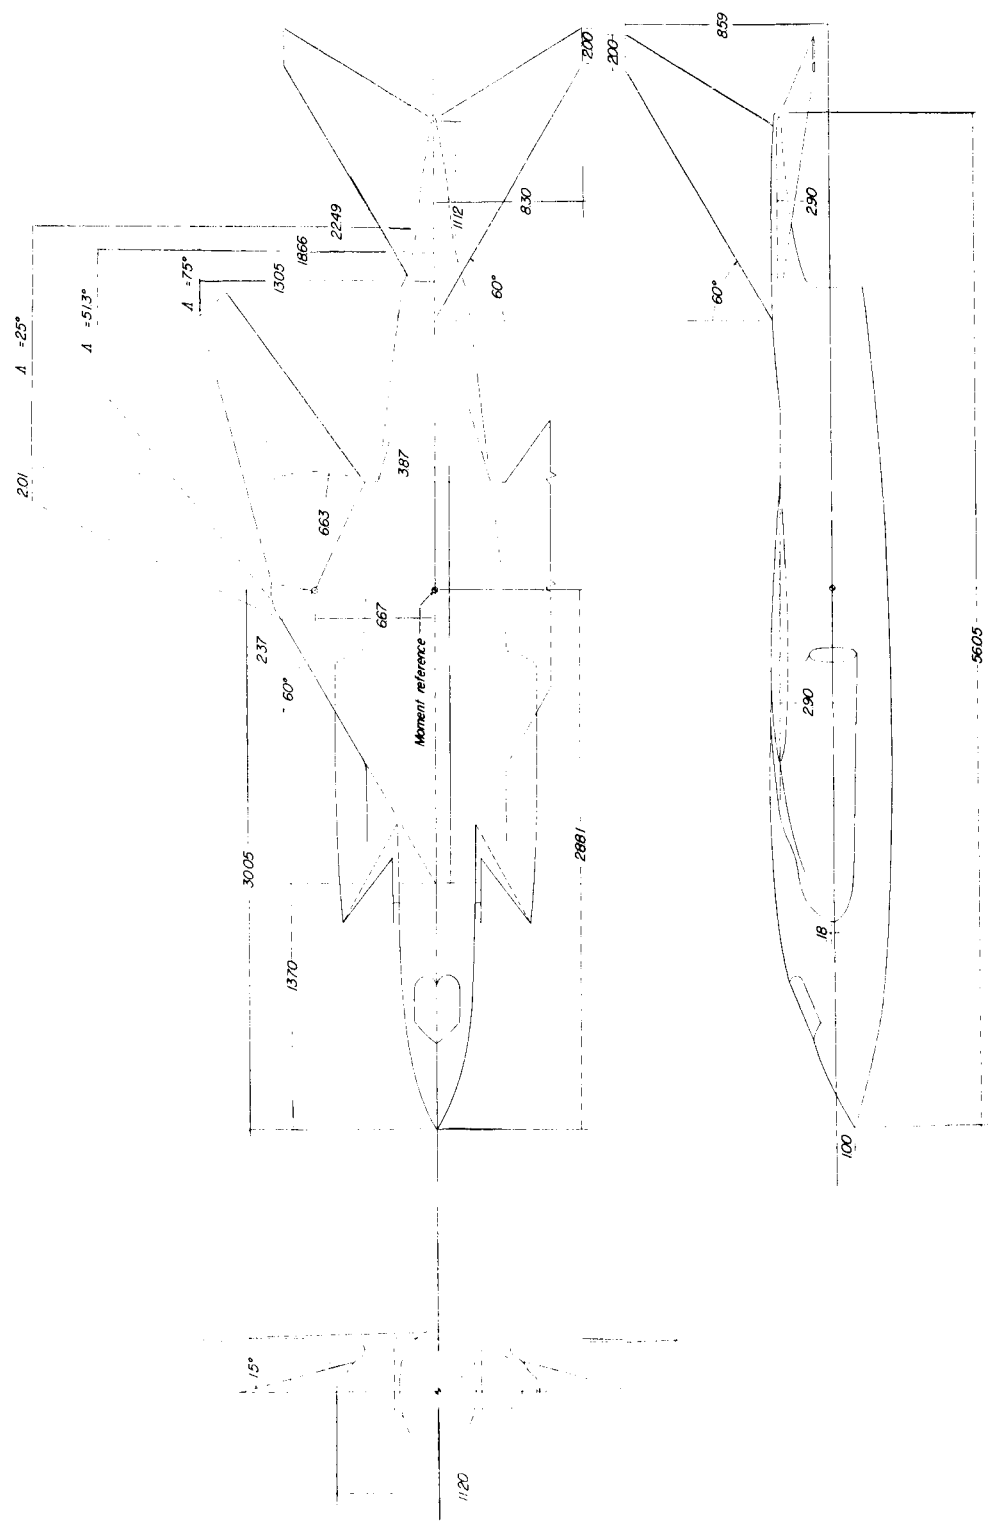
Drawing of model II. All dimensions in inches unless otherwise noted.
